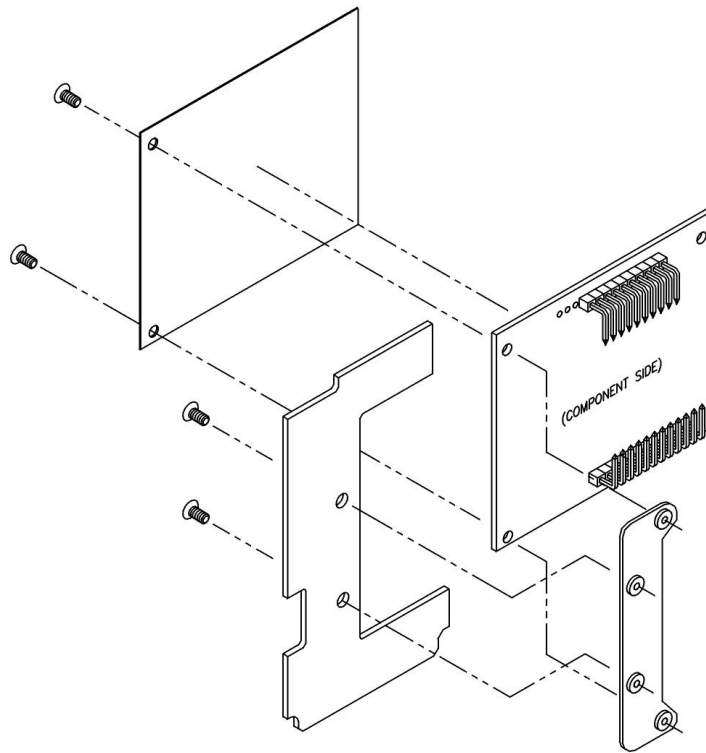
SureTemp Board & Mounting Support Exploded View (678 OEM)
